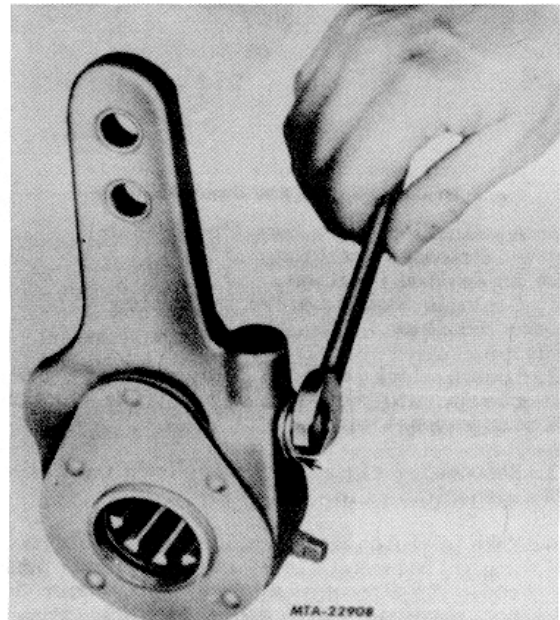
Slack Adjuster Locking Sleeve on Adjusting Nut
